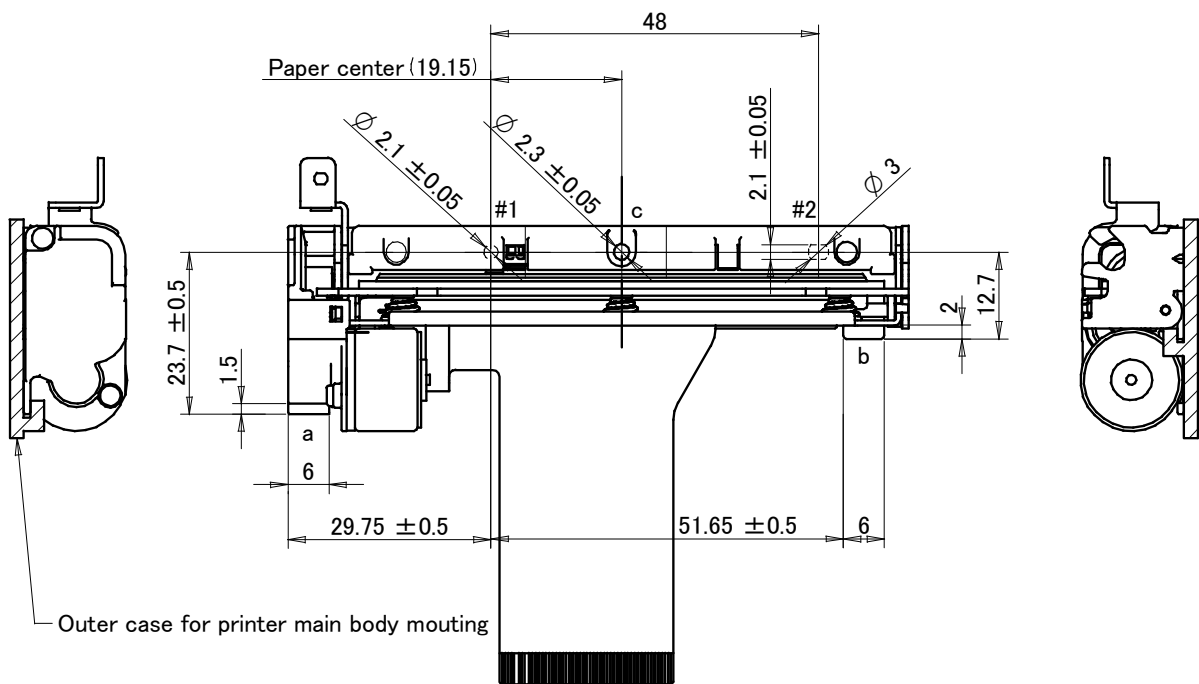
and Figure 6-2 show dimensions for positioning and securing the printer main body.
